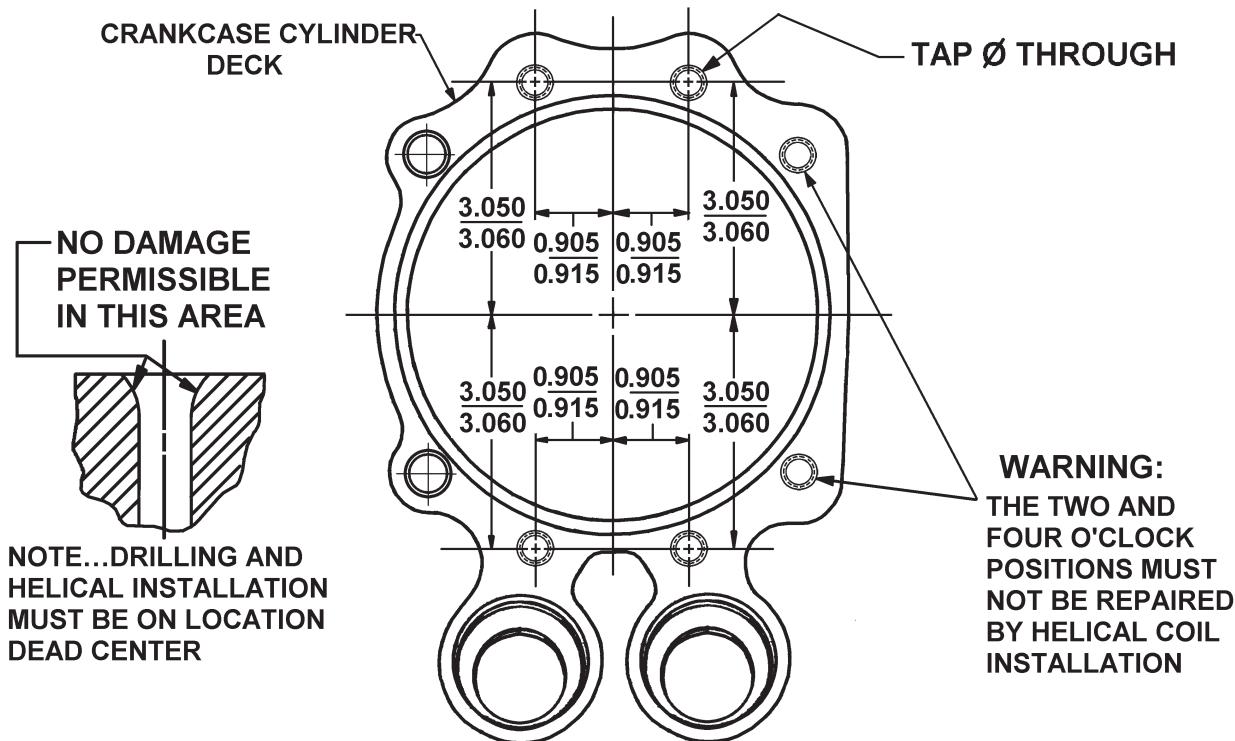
Cylinder Deck Stud Helical Coil Repair Instructions
